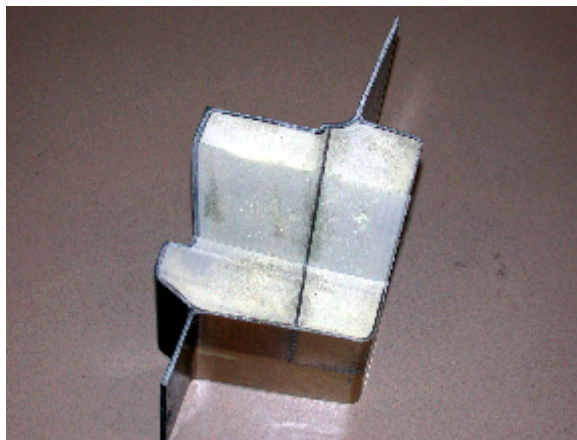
A cutout portion of molded pre-PV part from aluminum tool.
